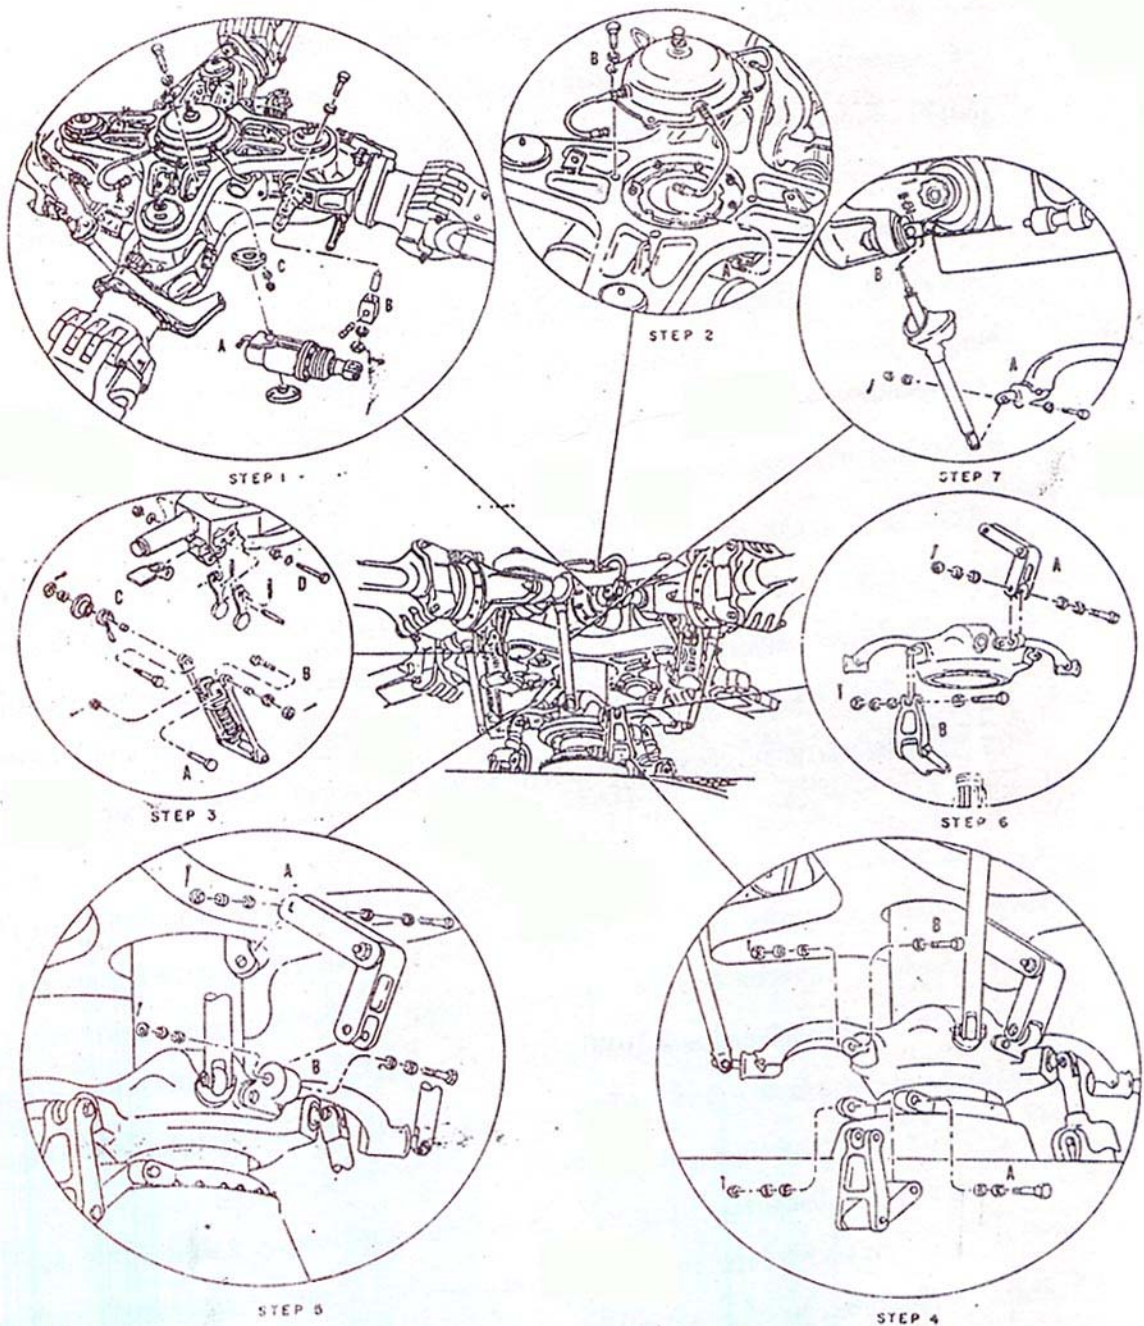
Main Rotor Head Assembly Components Removal - Installation
